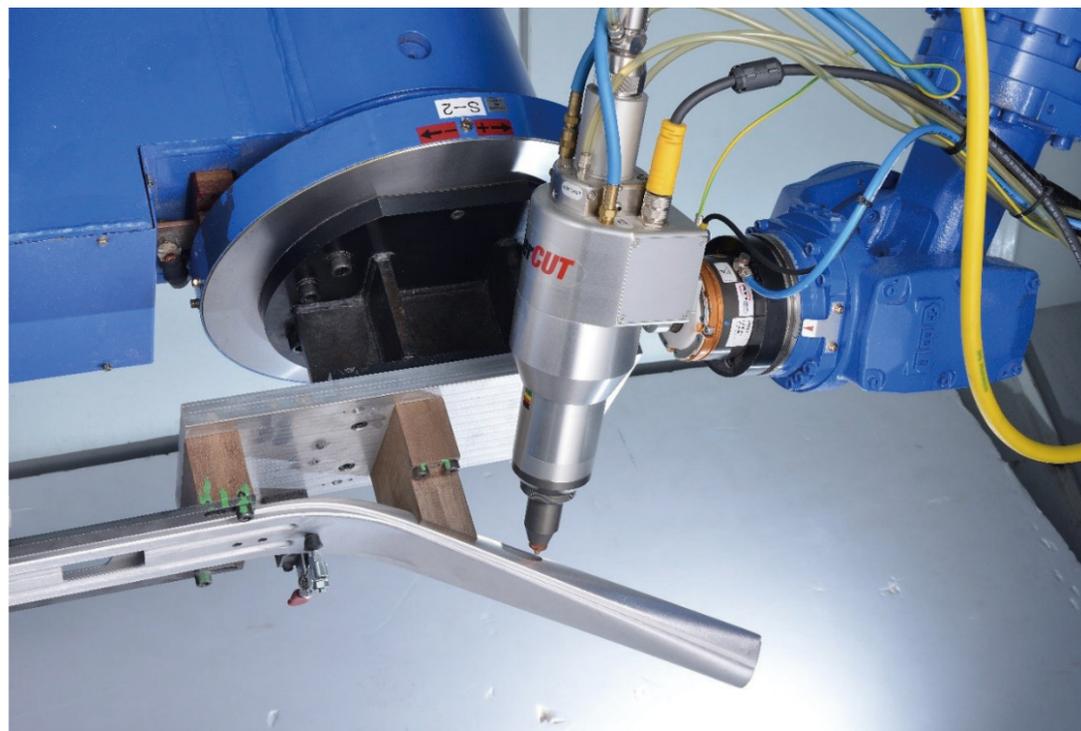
Fiber Laser Cutting of Hydro-formed bicycle tubes (Photo courtesy by Shuz Tung Machinery Industrial Co., Ltd.)
